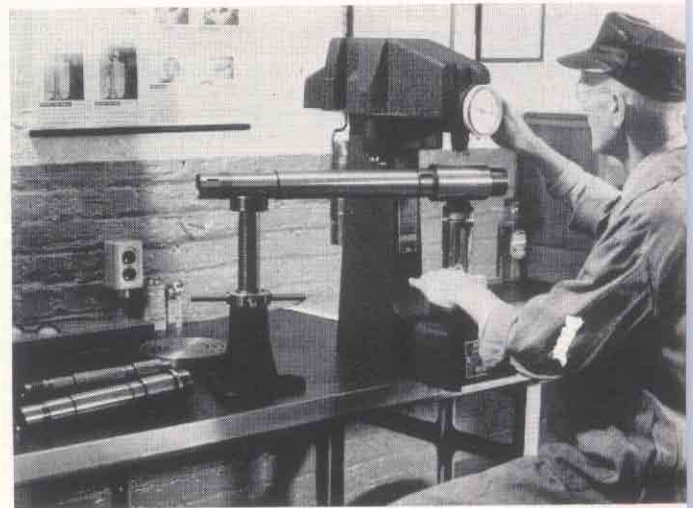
Testing the Hardness of a Carburized Headstock Spindle Bearing Surface
